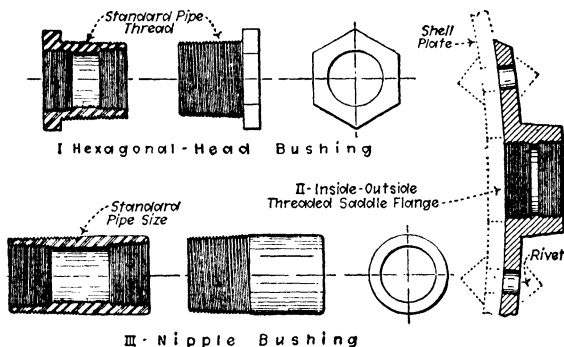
Boiler bushings and flange (A.S.M.E. Code).
